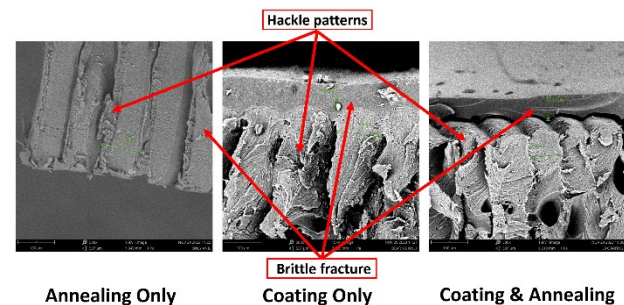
The fracture surface affected by resin coating and heat treatment.
